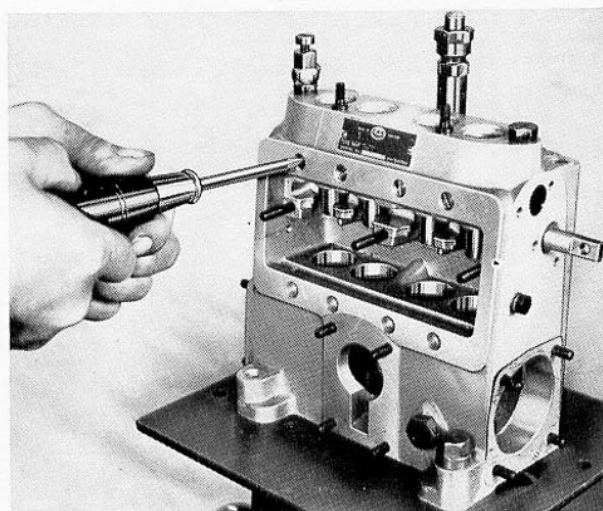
UNSCREWING THE BARREL LOCKING SCREWS
